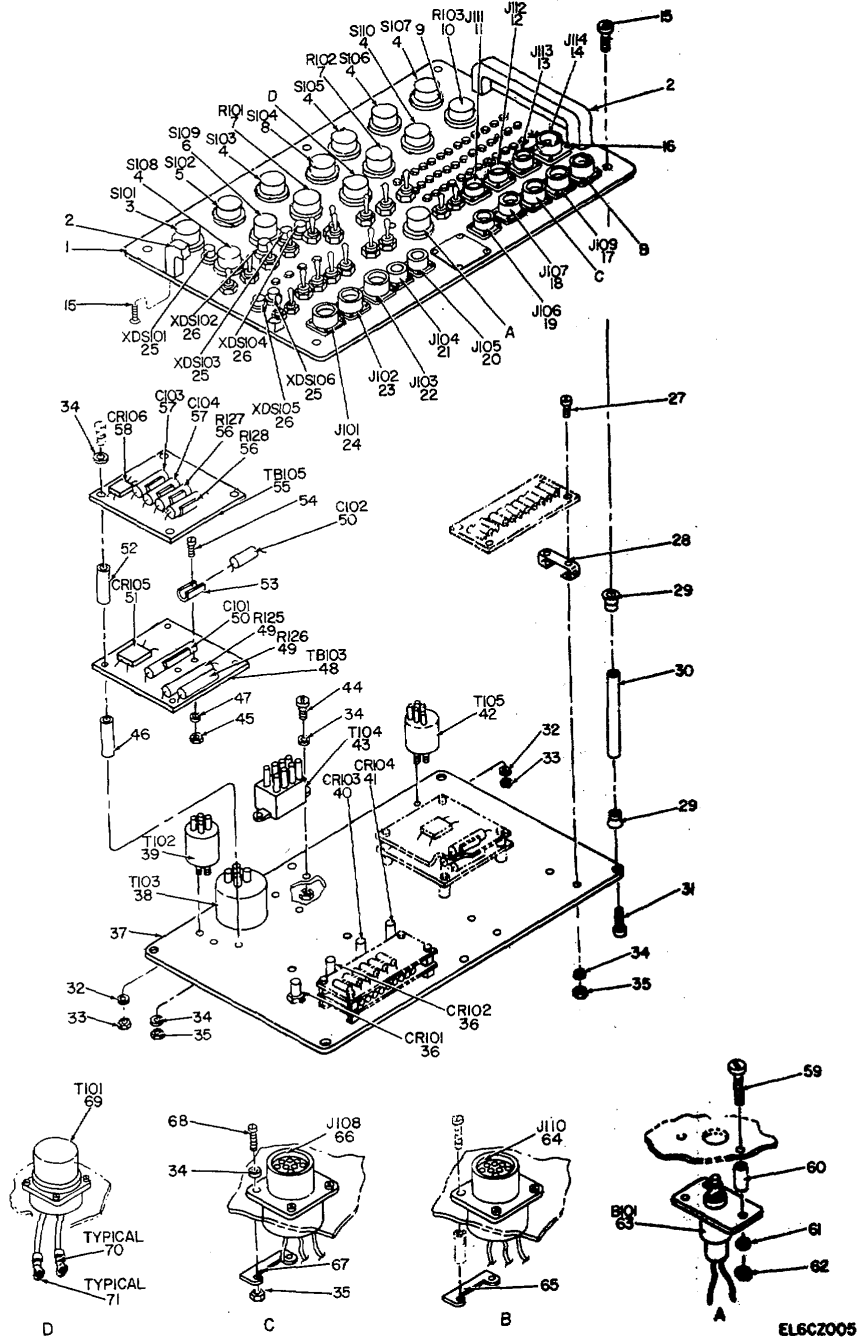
Panel, Test Electrical TS-3030/ASM-417 (Sheet 1 of 3).
